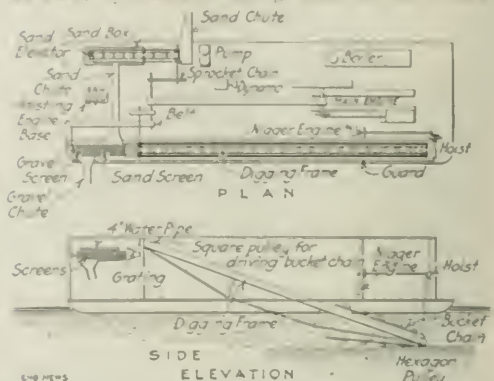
PLAN and ELEVATION of SIDE-LADDER DREDGE.
